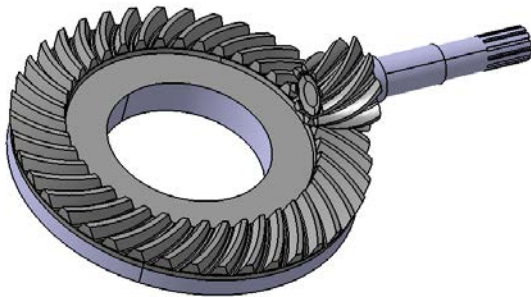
Three-Dimensional Models Of Spiral Bevel Gears
